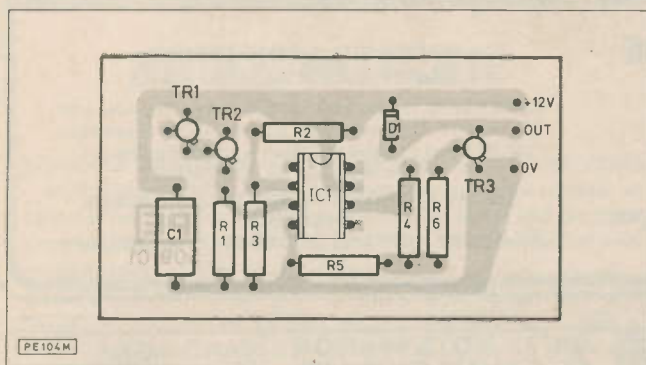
Component layout on the printed circuit board, for the boxed part of the unit. The p.c.b. is available from the PE PCB Service, as shown in the components list
